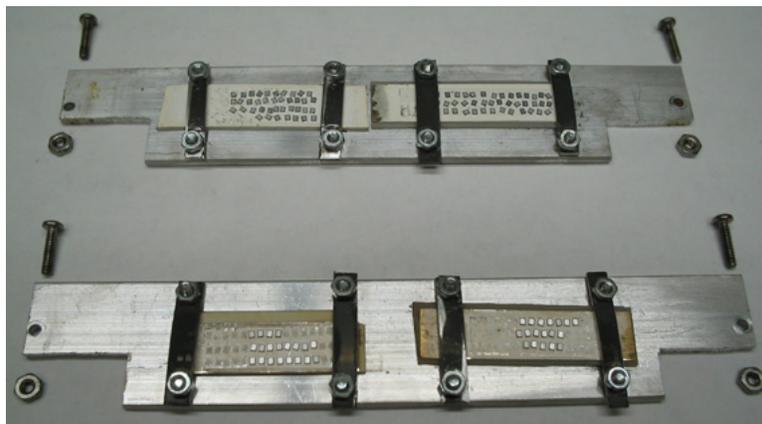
The fixture and samples used for the 50-250°C thermal cycling.
